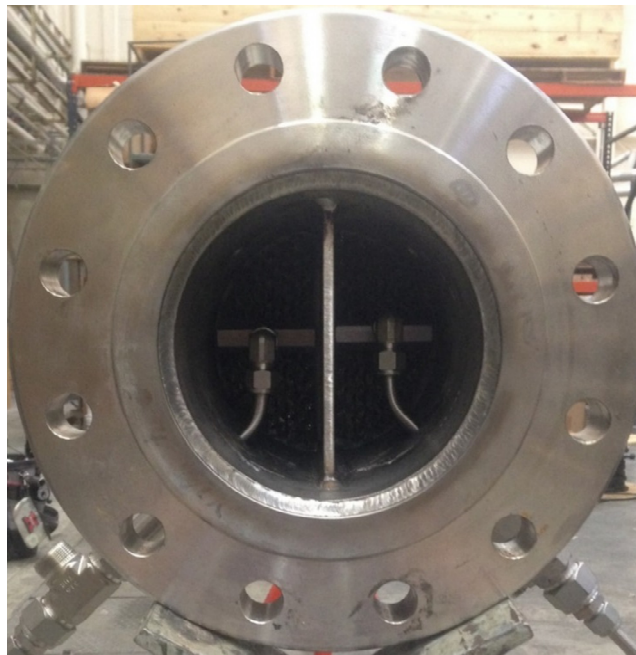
Top of the wall section showing the welded wall and the distributors for prefrac and mainfrac reflux flows
